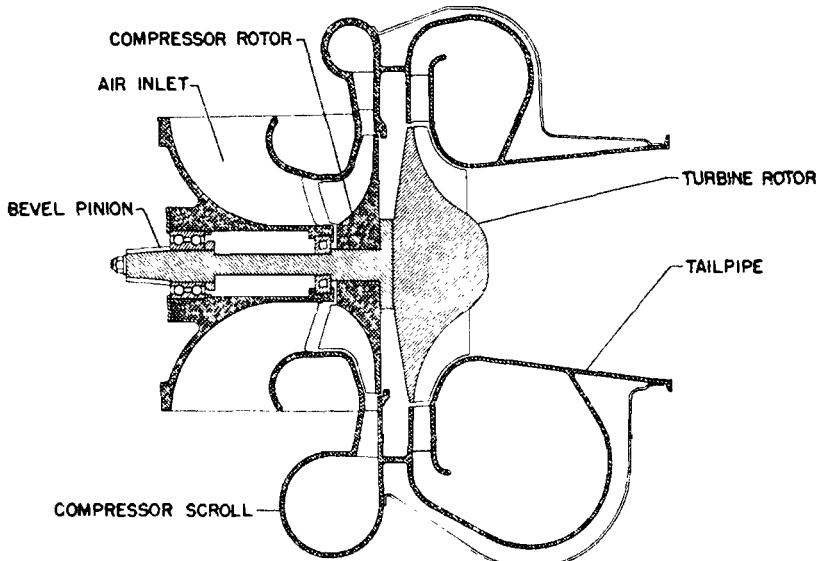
Sectionalized view of the rotor (turbine and compressor) of the gas turbine drive fire pump. The turbine is a radial flow type.
